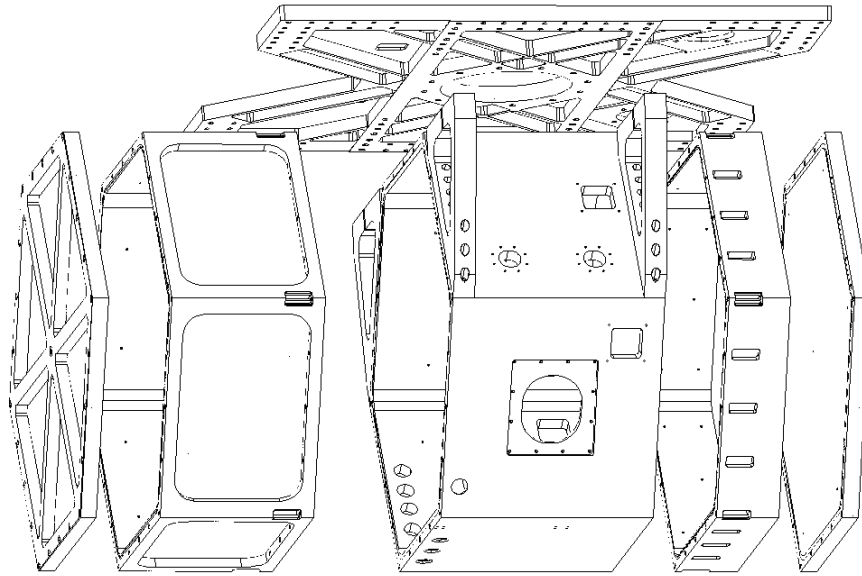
GSAOI ISS interface plate (top) and exploded view of the vacuum jacket.
